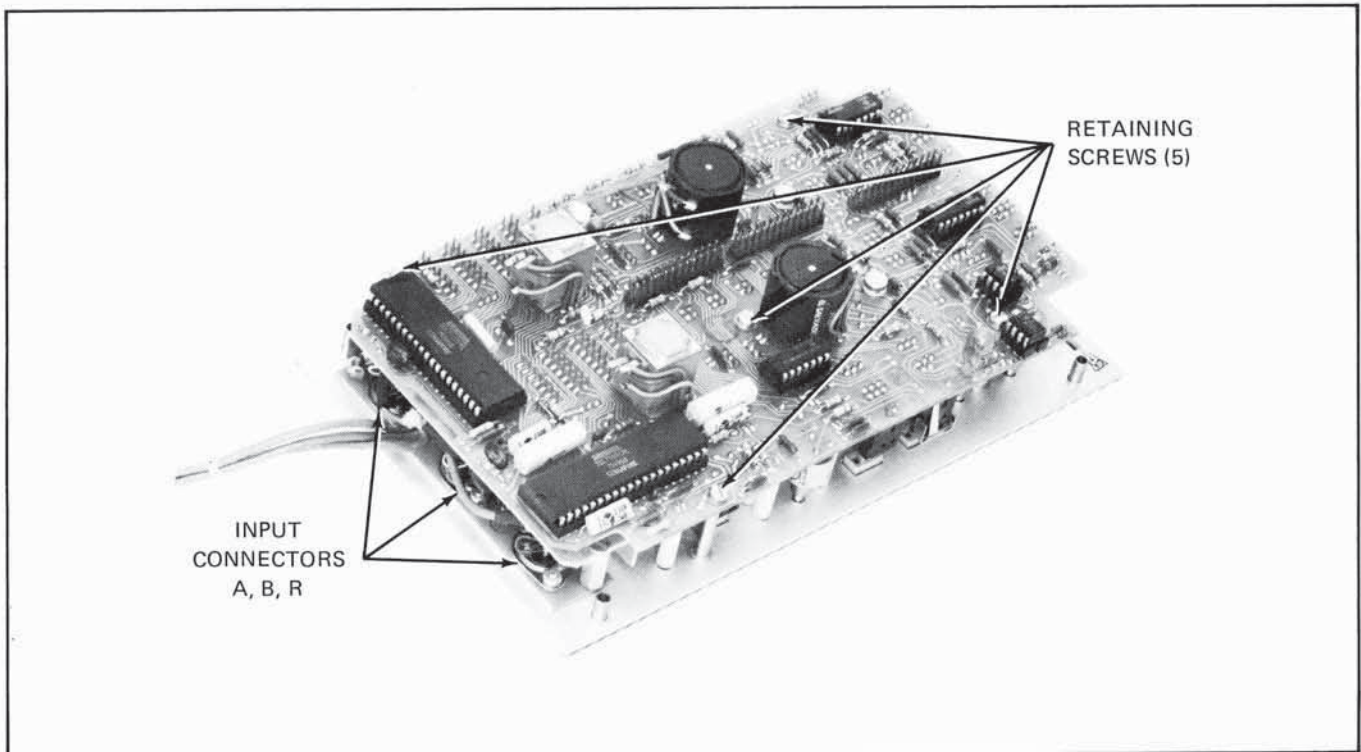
Front Panel Assembly With A1 PCB Retaining Screws and Input Connectors Indexed
